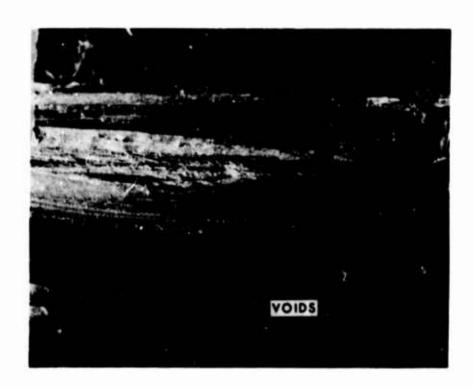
Weld Splatter - Gear/Flange Weld.
